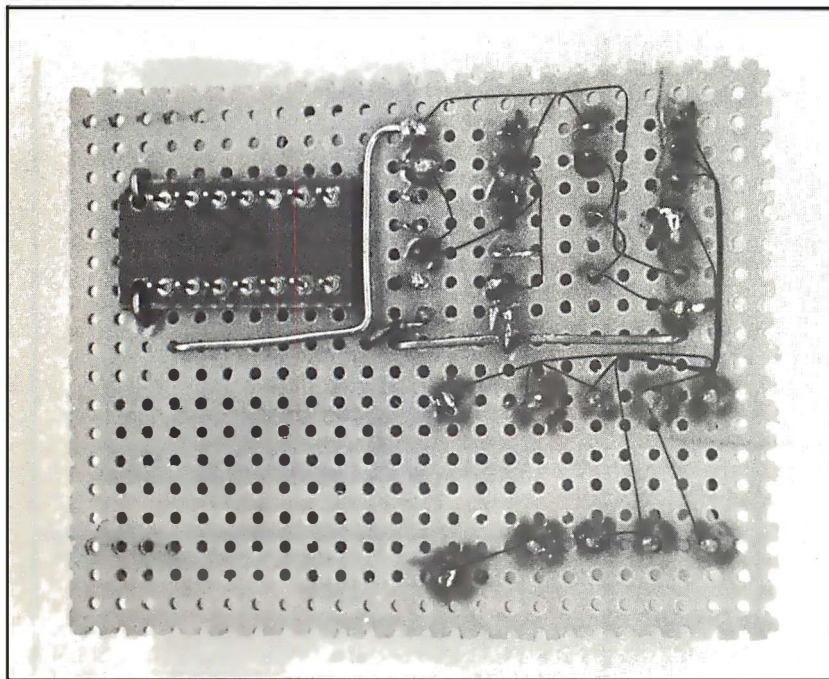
Bottom view of the SwTPC 6800 processor clock speed modifier circuit.
